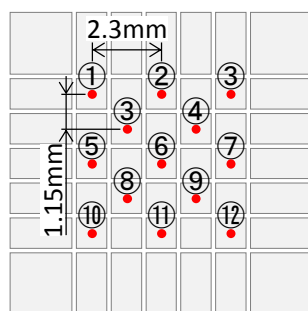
Laser heating part to produce chessboard magnetization pattern on a sintered magnet
